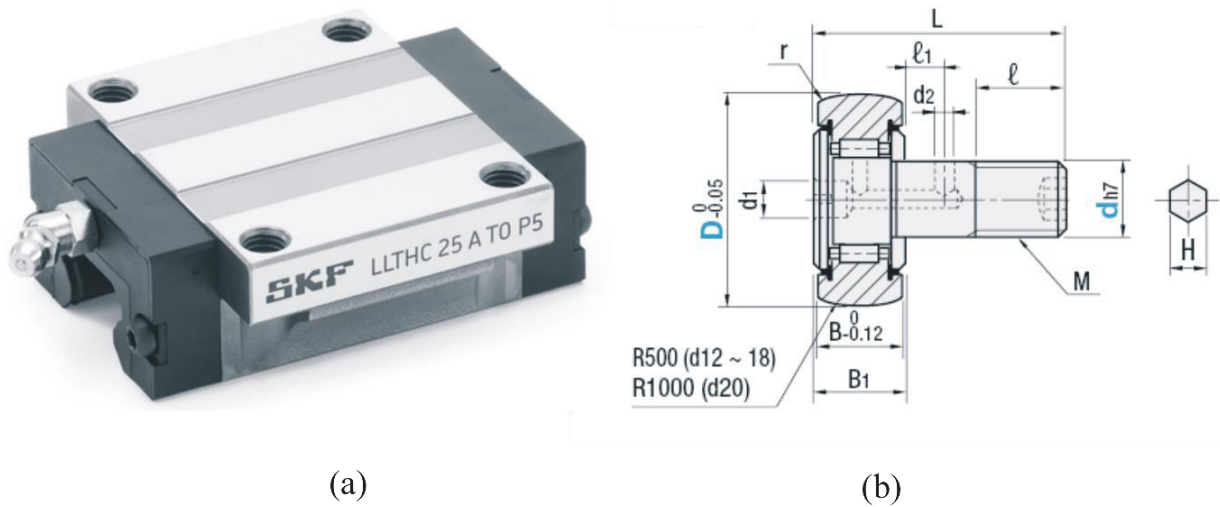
(a) Recirculating ball bearing and (b) cam follower bearing.
